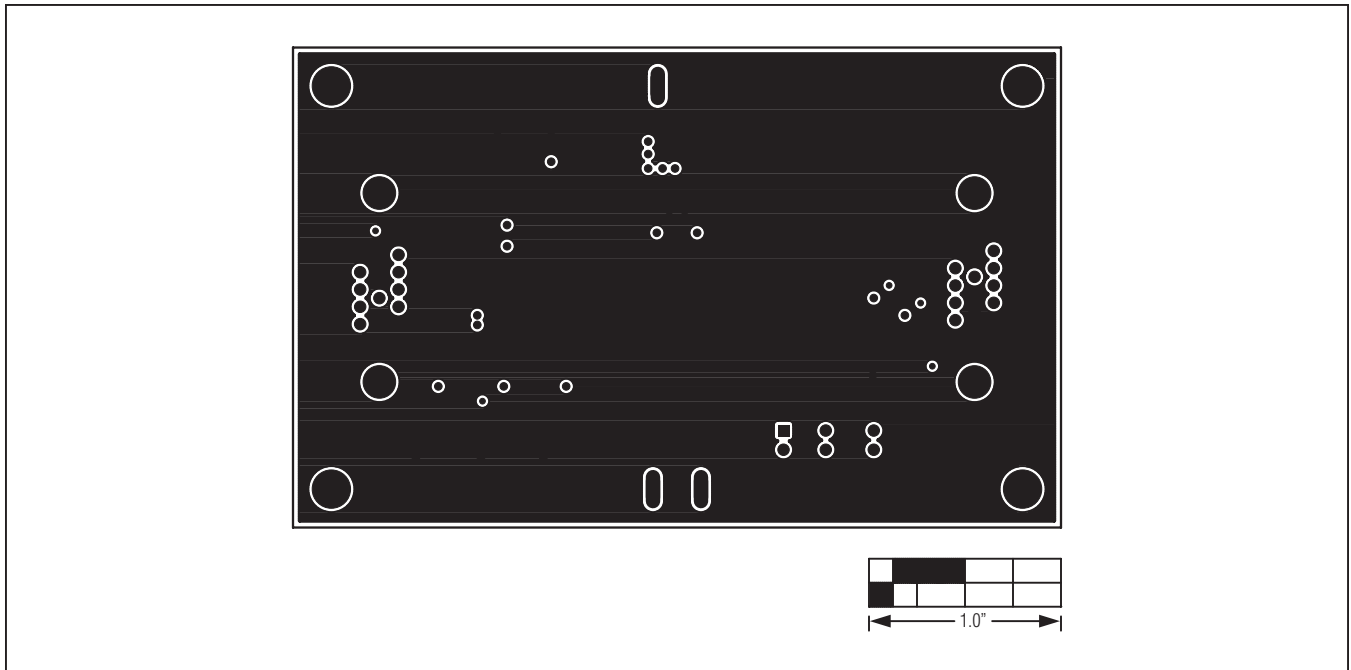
MAX14984 EV Kit PCB Layout—GND Layer 2
